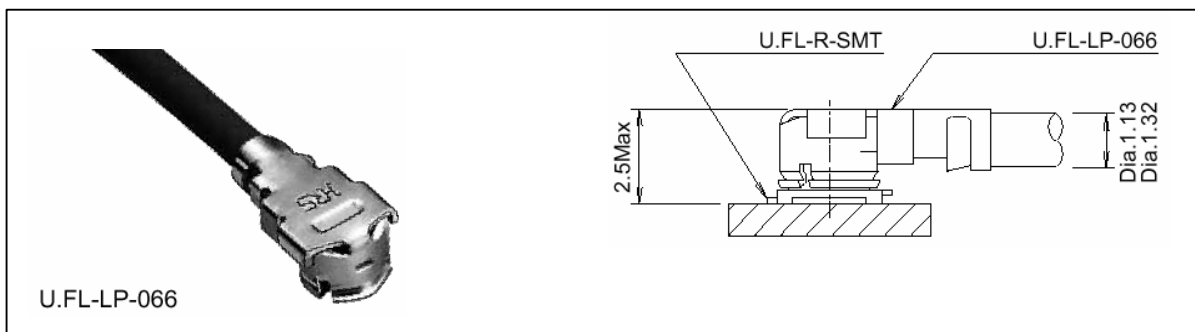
U.FL-R-SMT connector with U.FL-LP-066 plug
